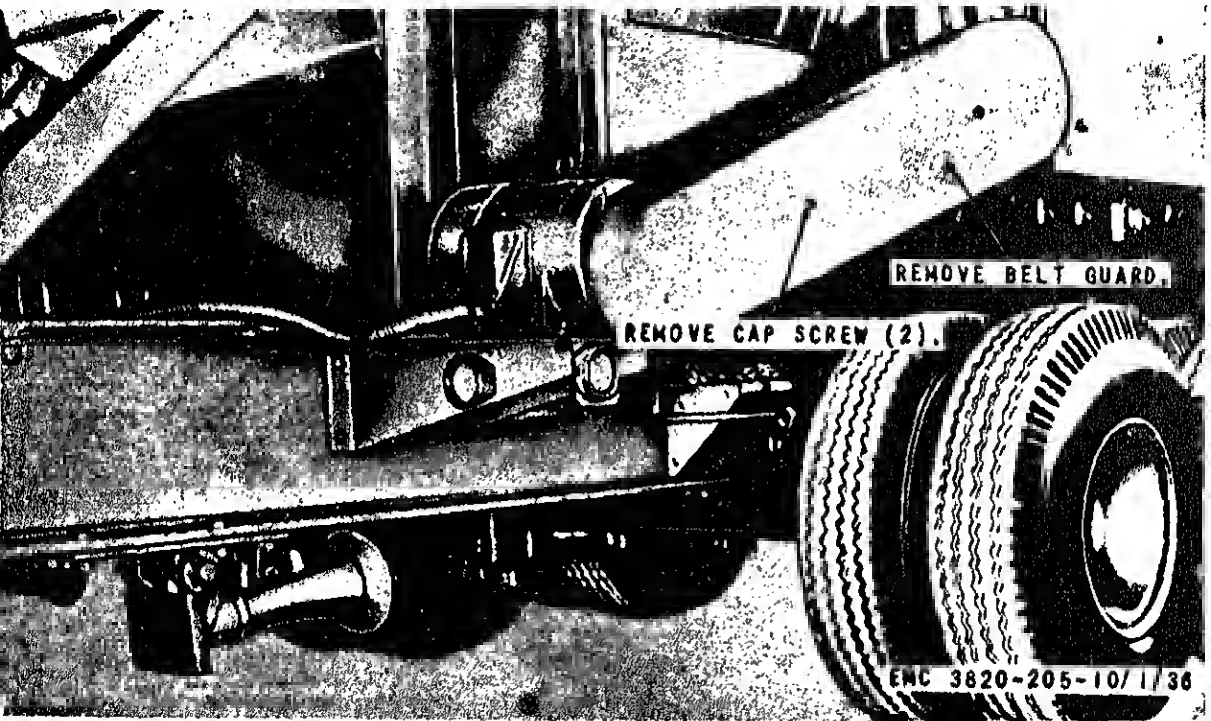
Return (under) conveyor drive belt guard, removal and installation.
